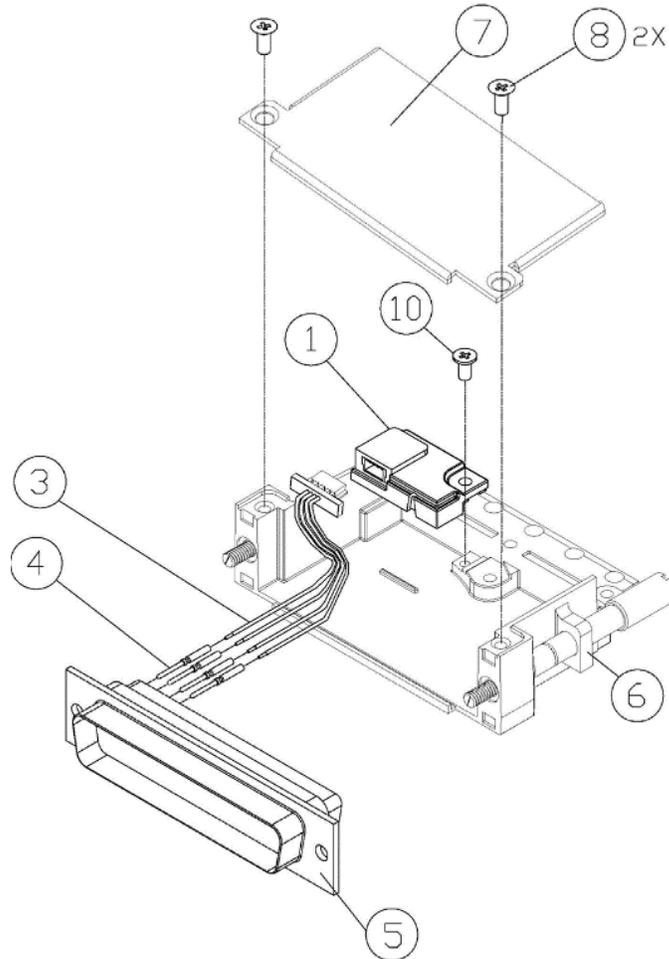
Shield Block Termination on Jackscrew Backshell Assembly
